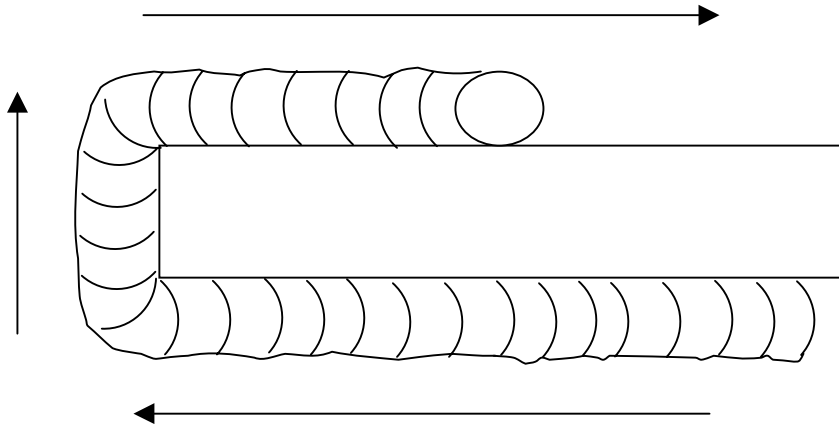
Attaching this stiffener to a structural member using a non-continuous fillet weld significantly reduces the fatigue performance of the component.
